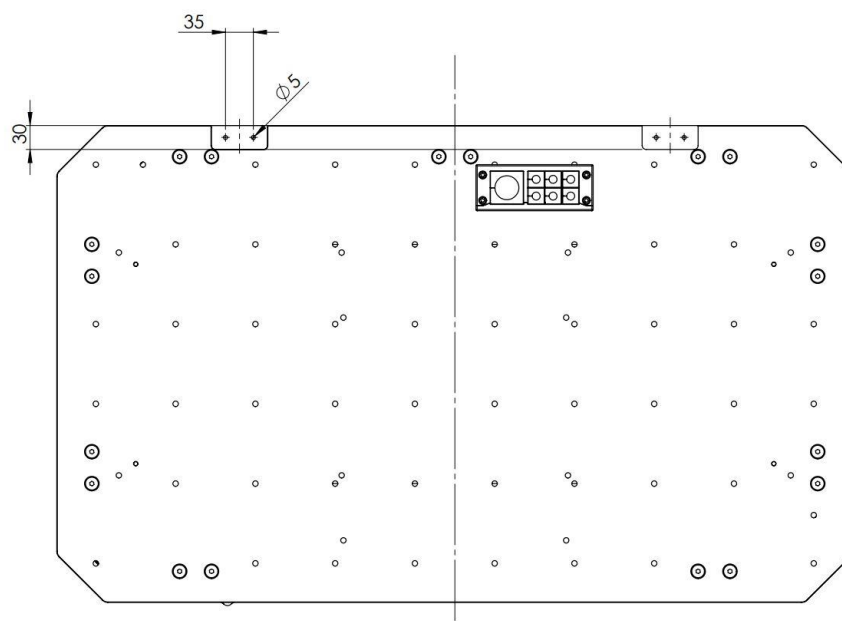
Dimensions of notches for mounting devices (valid for MRB S, M und L)
